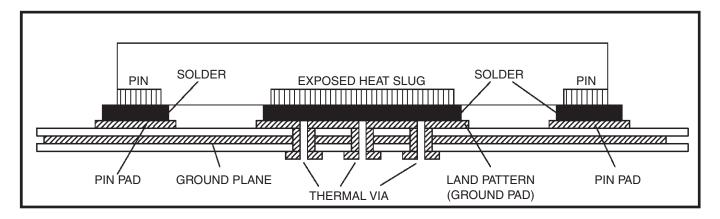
P.C. Assembly for Exposed Pad Thermal Release Path – Side View (drawing not to scale)
